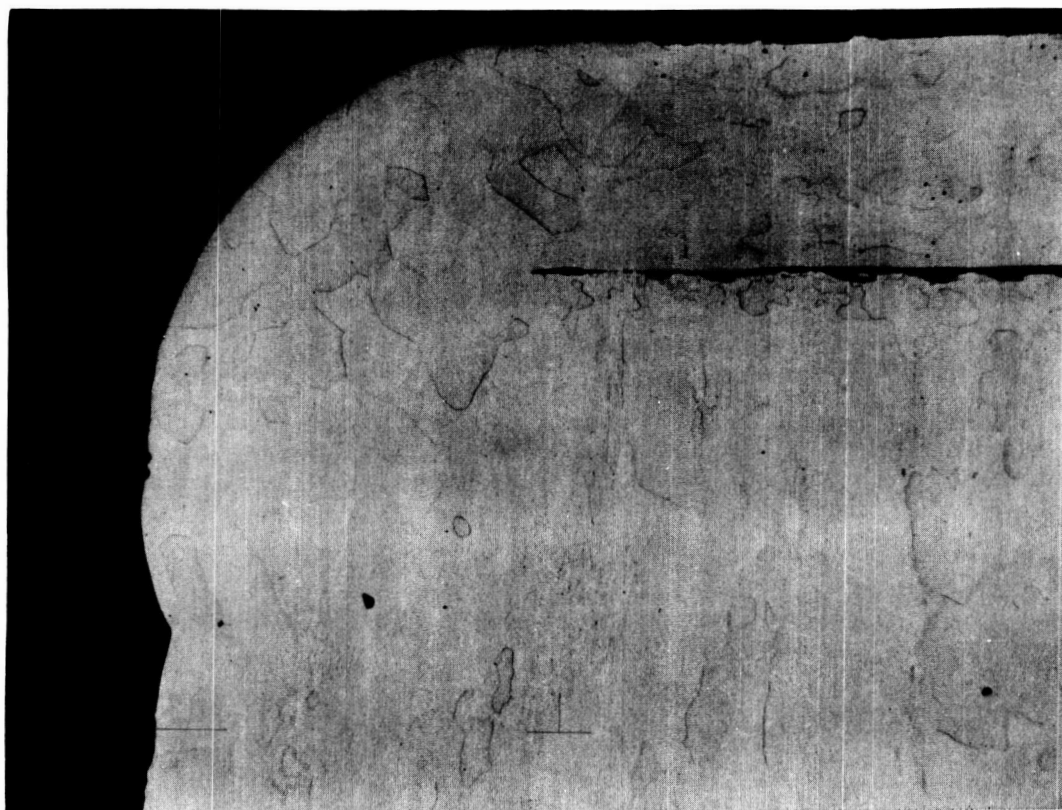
Cross Section of Electron Beam Weld Between Cb-1Zr Diaphragm and Cb-1Zr Upper Flange of Taylor Pressure Transducer.
